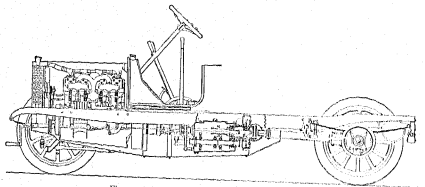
Car Chassis, Cardan Shaft System (elevation)
